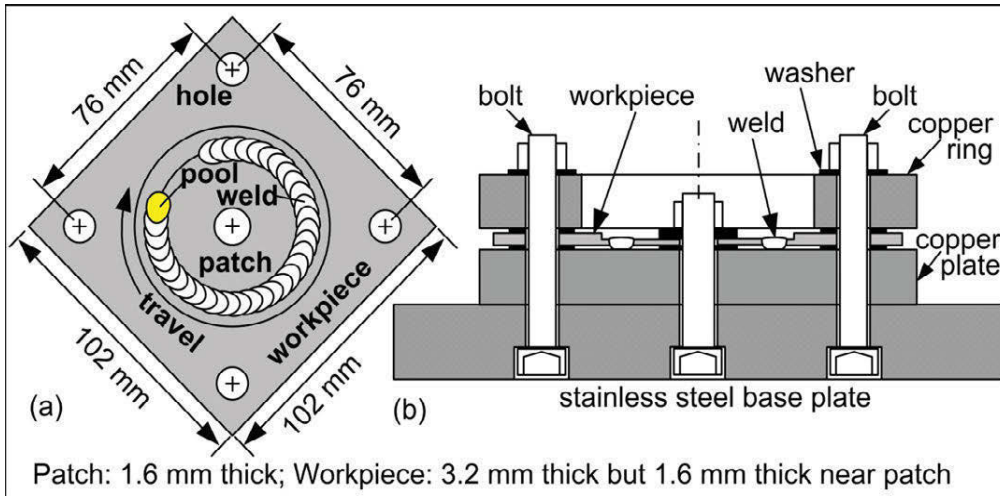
Apparatus for circular-patch welding test: (a) top view; (b) vertical cross-section.
